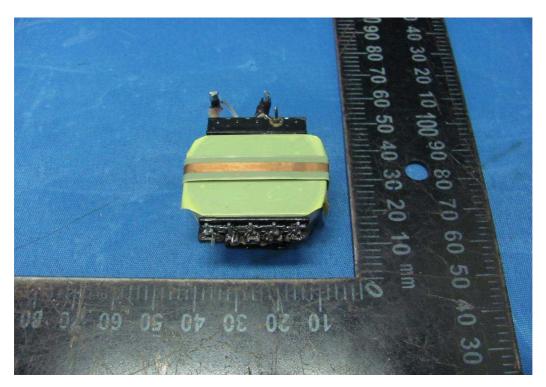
GT\*41133 series Bottom view of mains transformer (The ferrite core is wrapped around 2 layers of insulating tape.)
